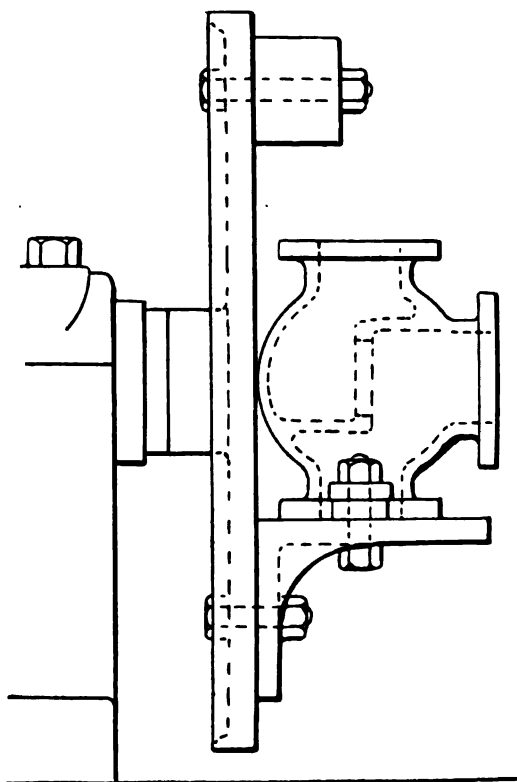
Angle Plate holding Valve or Cook Body on Face Plate of Lathe.
